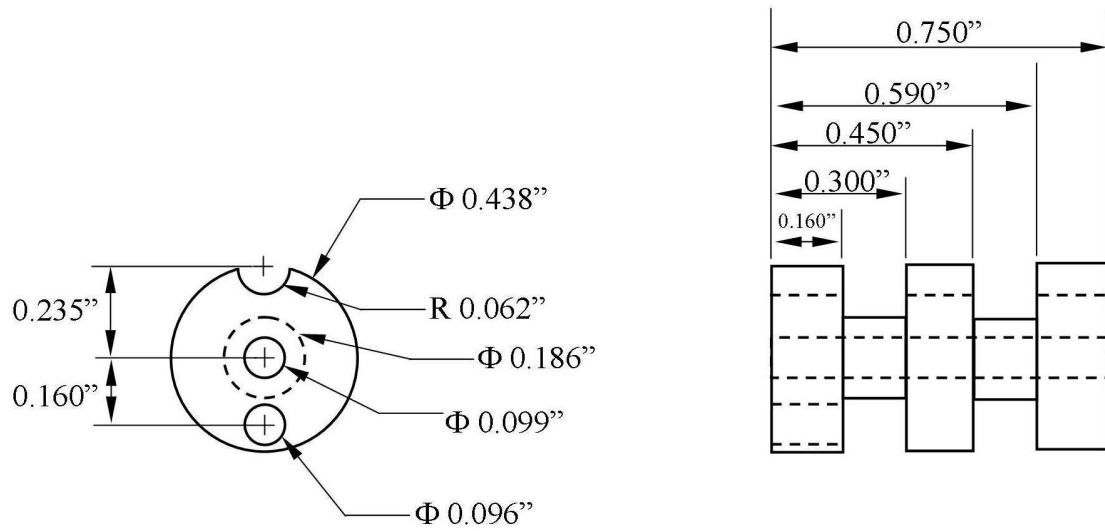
Drawing of PTFE solenoid bobbin.
